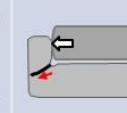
Needs and risks concerning fracture of rolling bearing.
